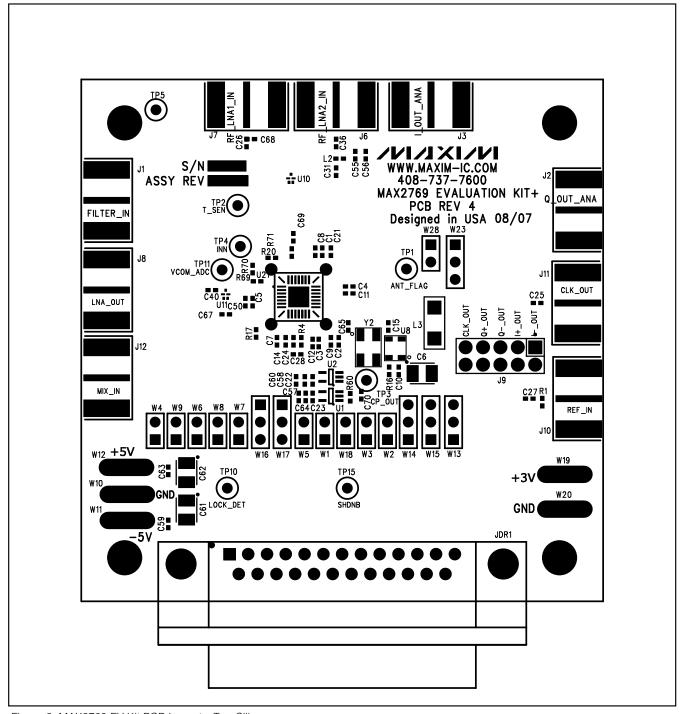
MAX2769 EV Kit PCB Layout—Top Silkscreen
